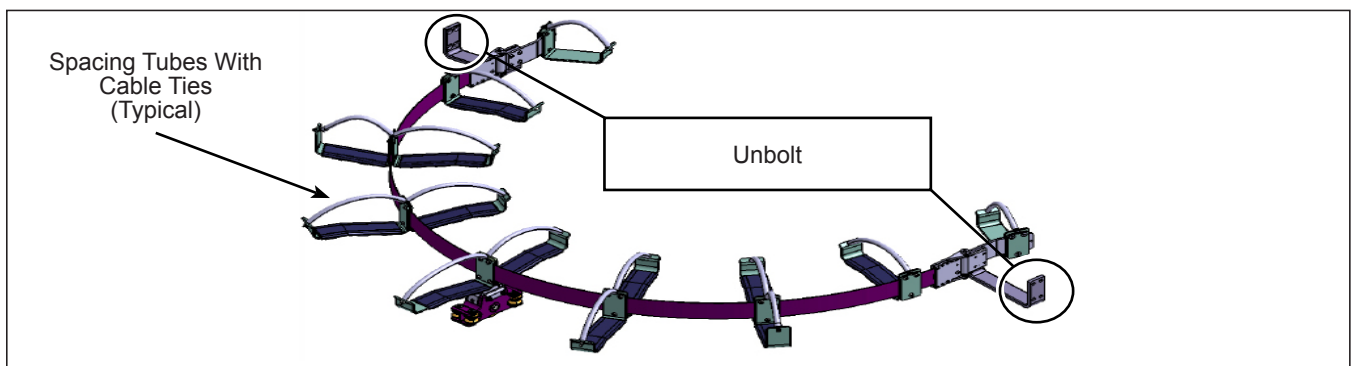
Remove the Spacing Tubes and Unbolt the EGS
